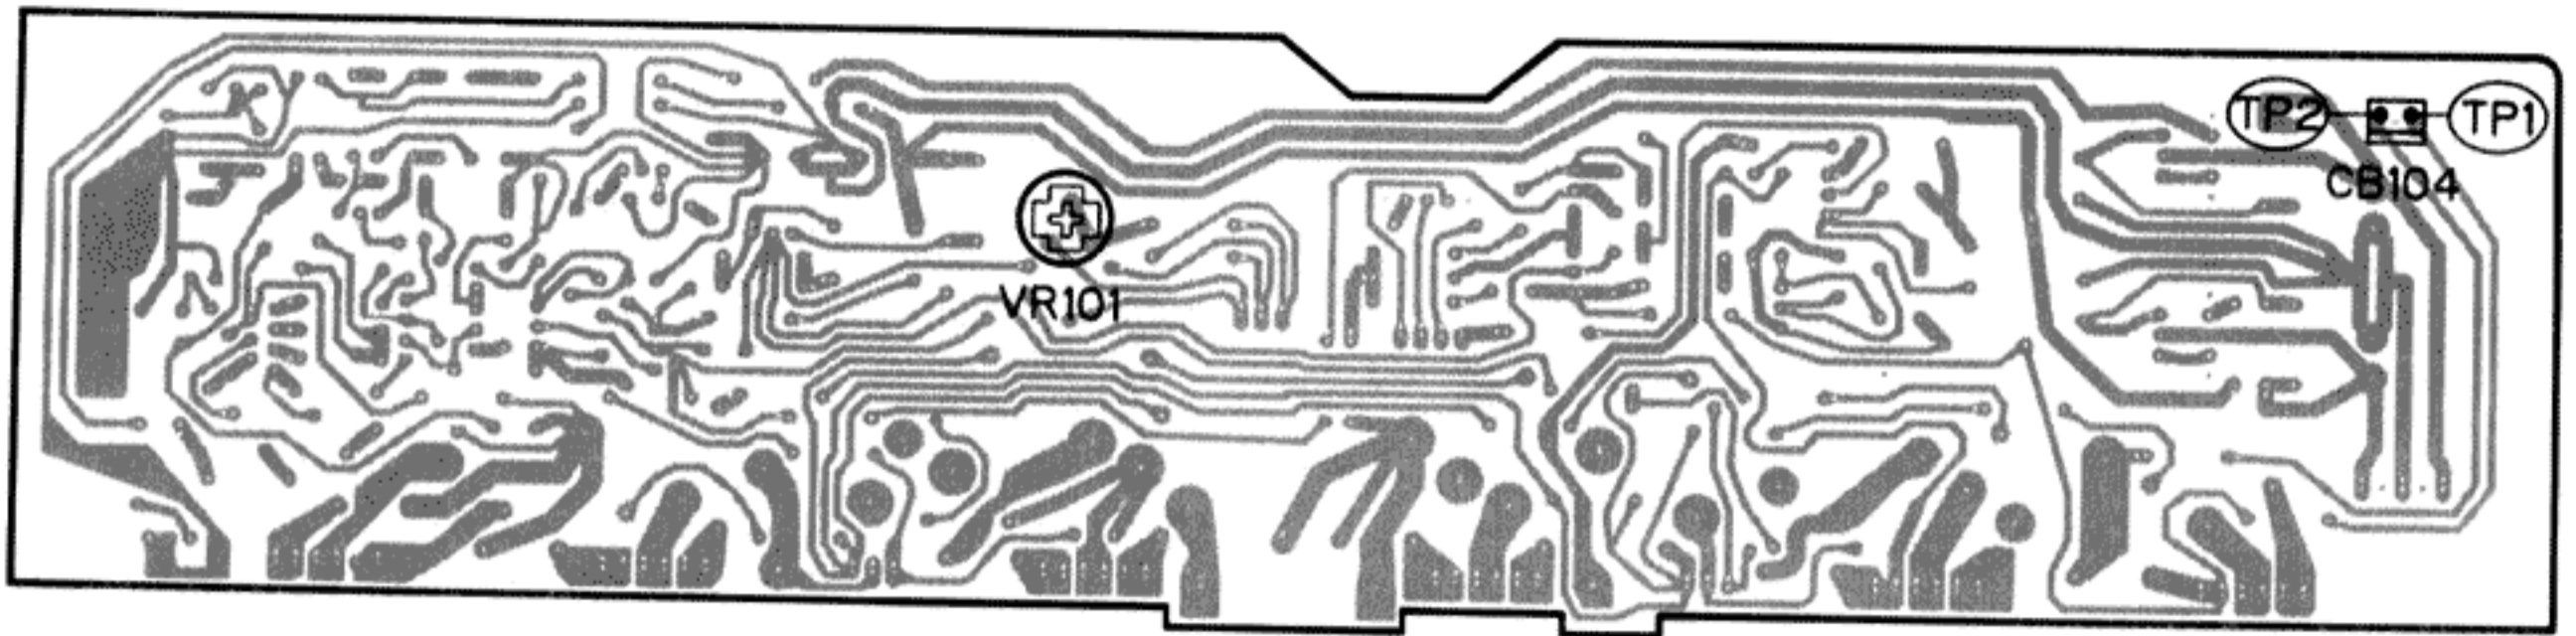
Main-Amp(L) P.C. Board(Component Side)
